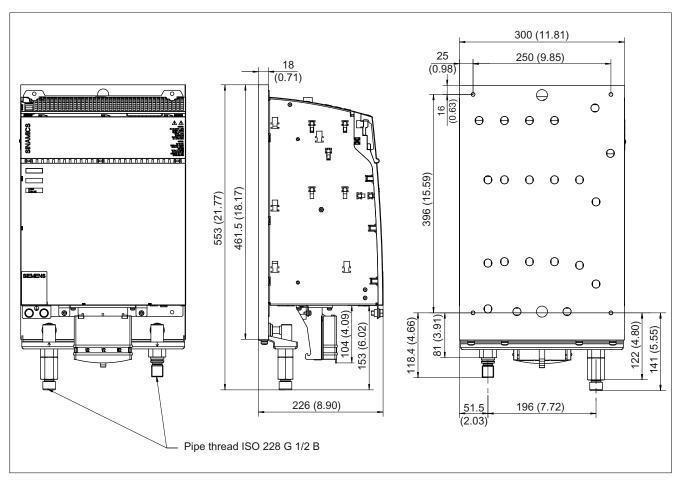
Dimension drawing of Motor Module Liquid Cooled (200 A), all dimensions in mm and (inches)
